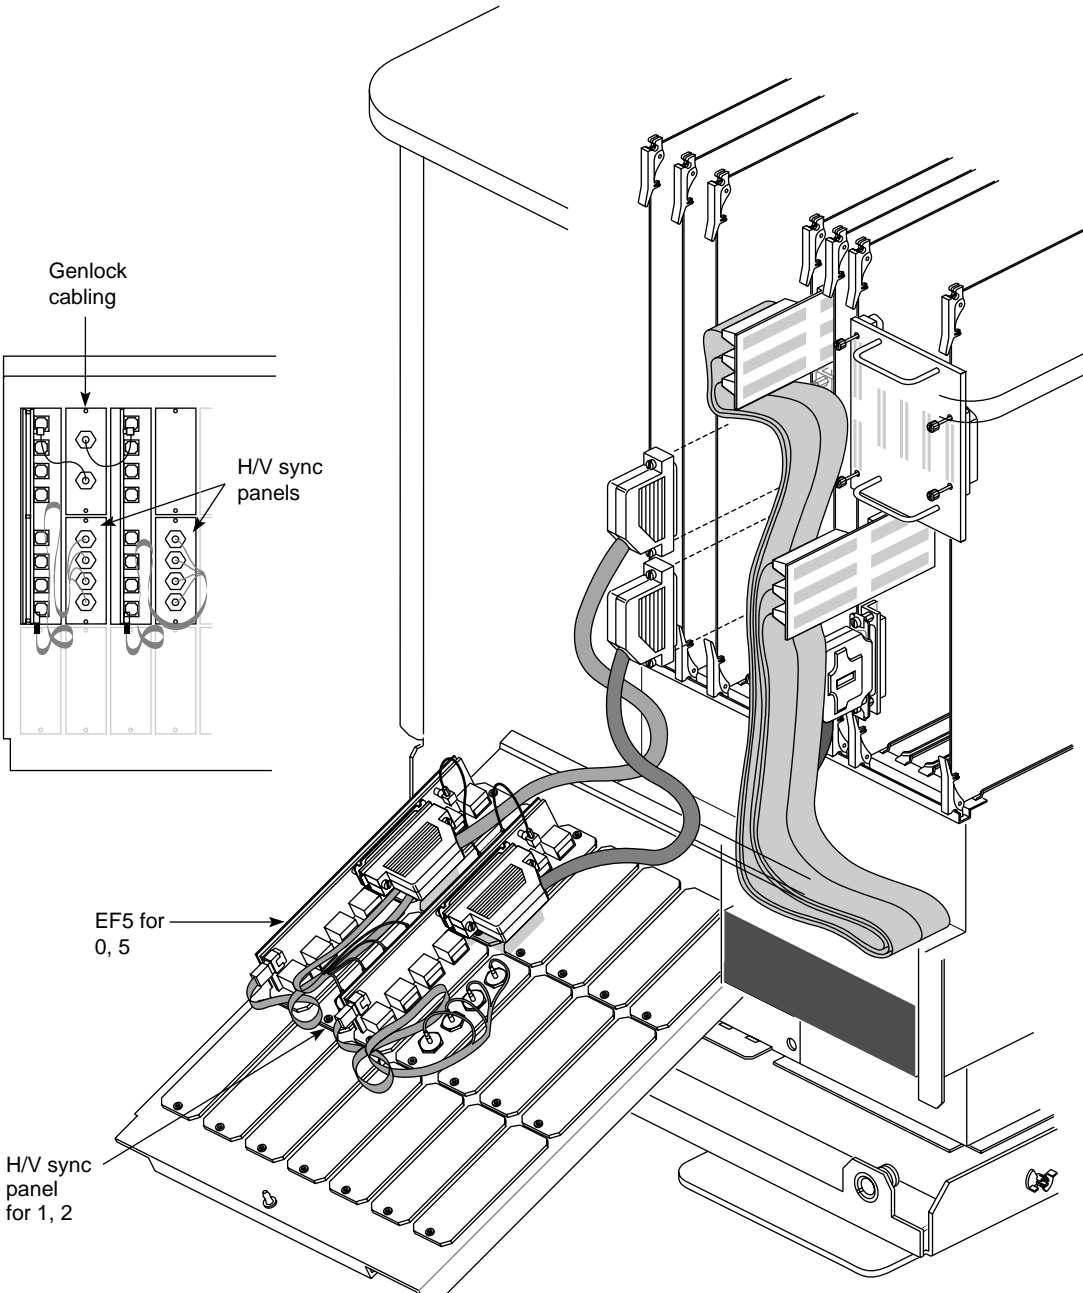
Complete Multi-Channel Option Installation for the Onyx Desktside Chassis
